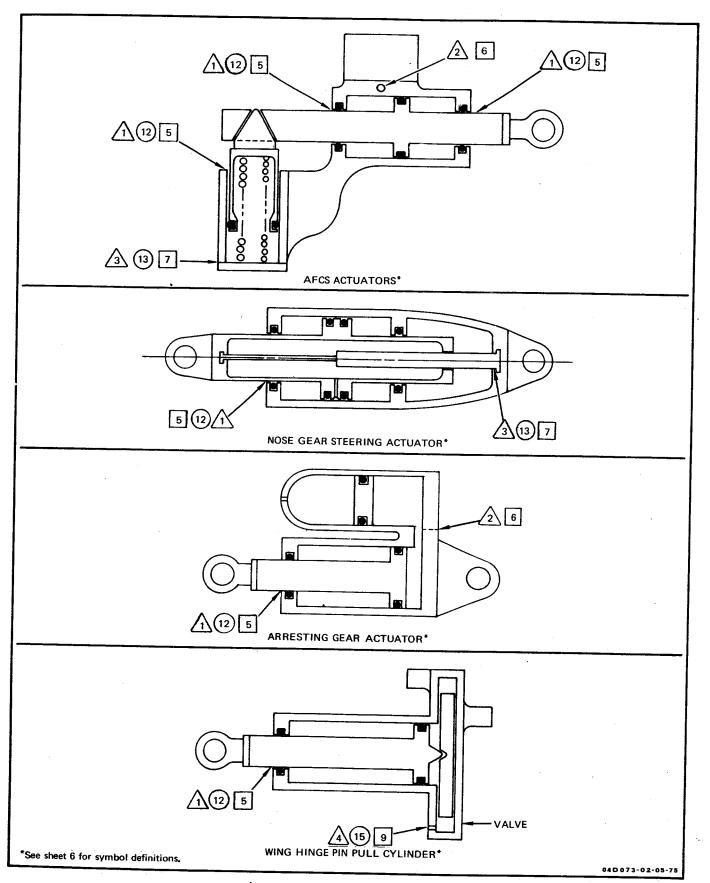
Hydraulic Component Allowable Leakage (Sheet 2)
